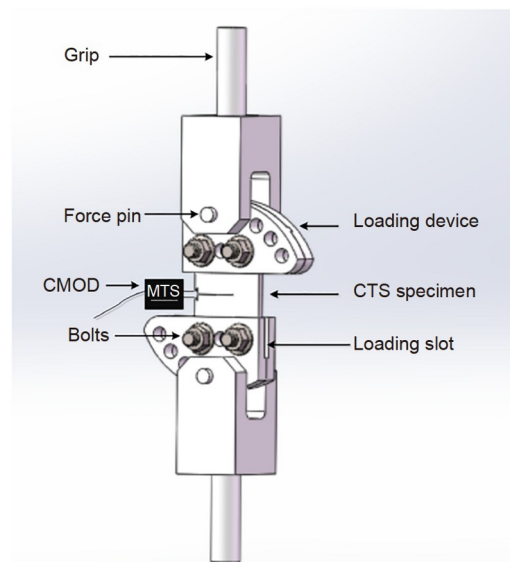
(Color online) Assembly drawing of the loading device for FCP_{I-II} rate tests.
